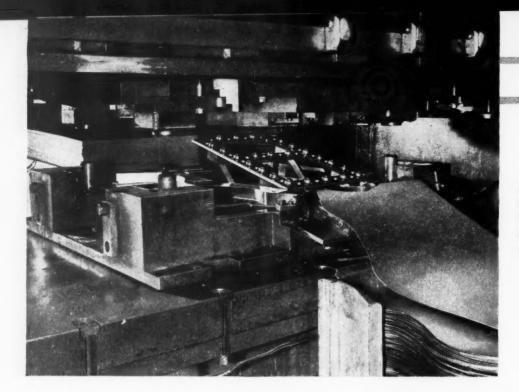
An automatic unloading device that is mounted within a blanking die speeds up the production of grille blanks
